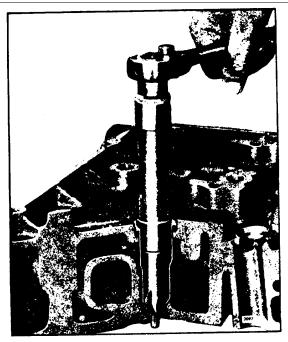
Reaming Injector Tube for Injector Nut with Reamer J 5286-9
